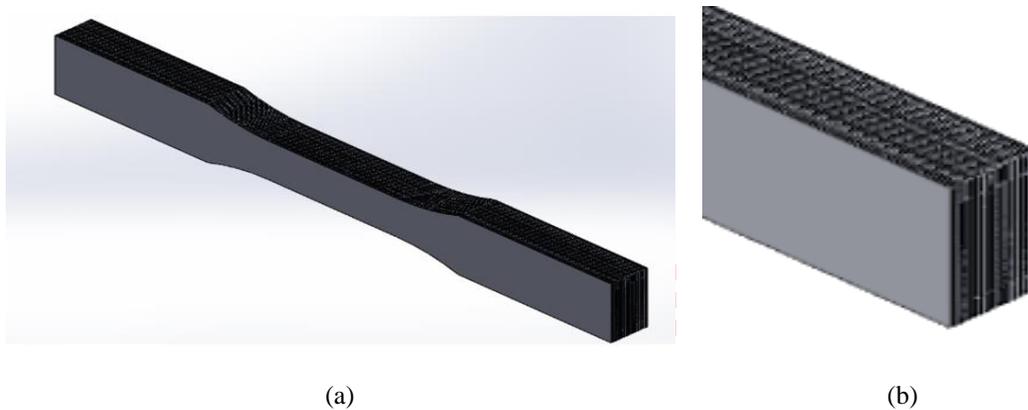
3D model of a tensile specimen with 32 layers: (a) overall view, (b) enlarged view.
